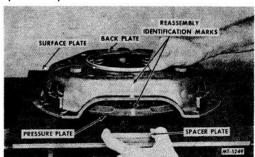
Selecting Proper SE-2068 Spacer Plates
